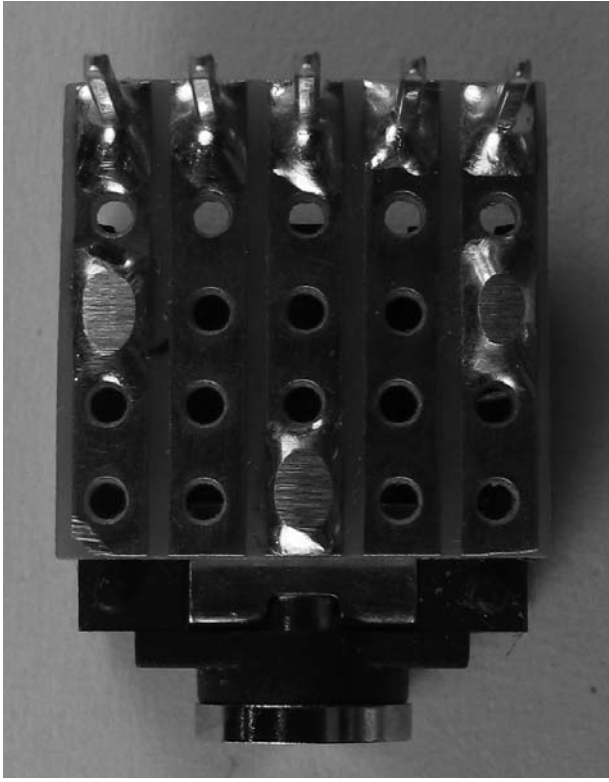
Bottom view of the completed mini-stereo jack adapter
